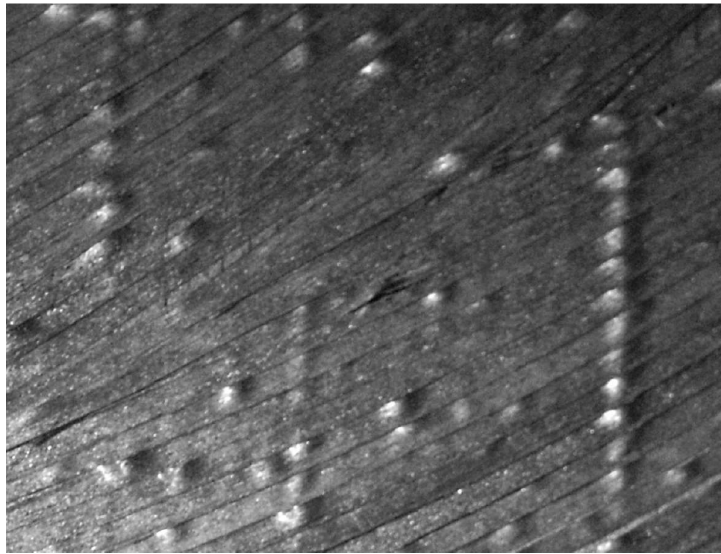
Kinking of tows due to excessive tow steering [5]
